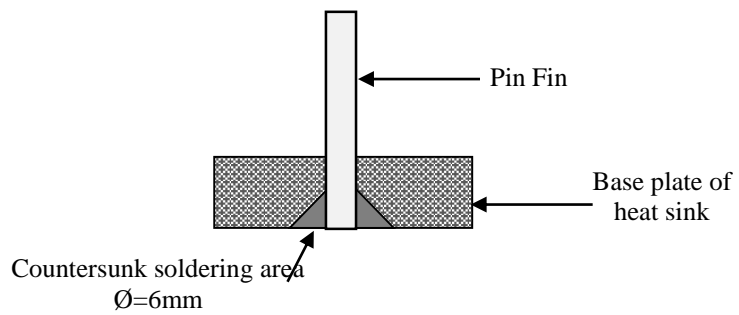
Schematic drawing of soldering area at the base plate of heat sink
